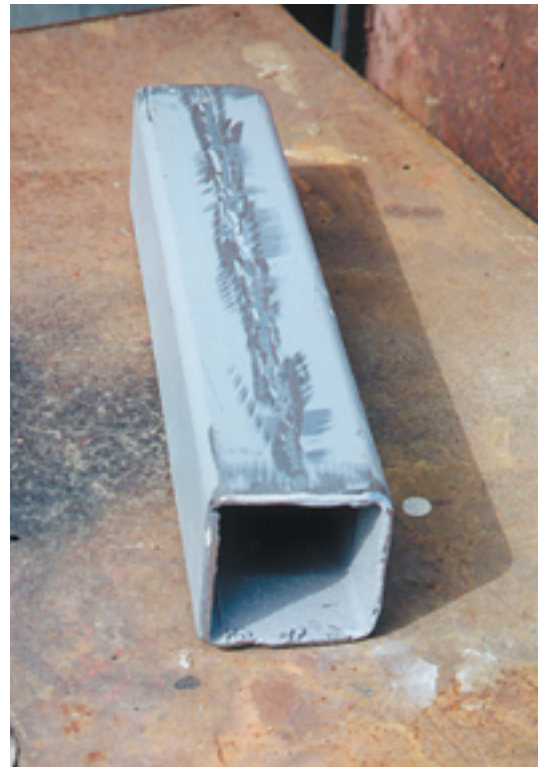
(to right) / Tube-type top side rail section cut to size, cleaned and beveled
